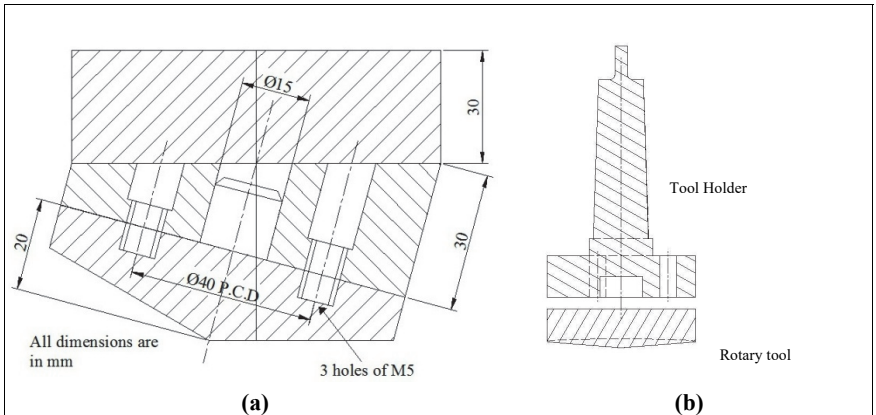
Design of Upper Conical Rotary Forging Die and Die Tool Holder.
